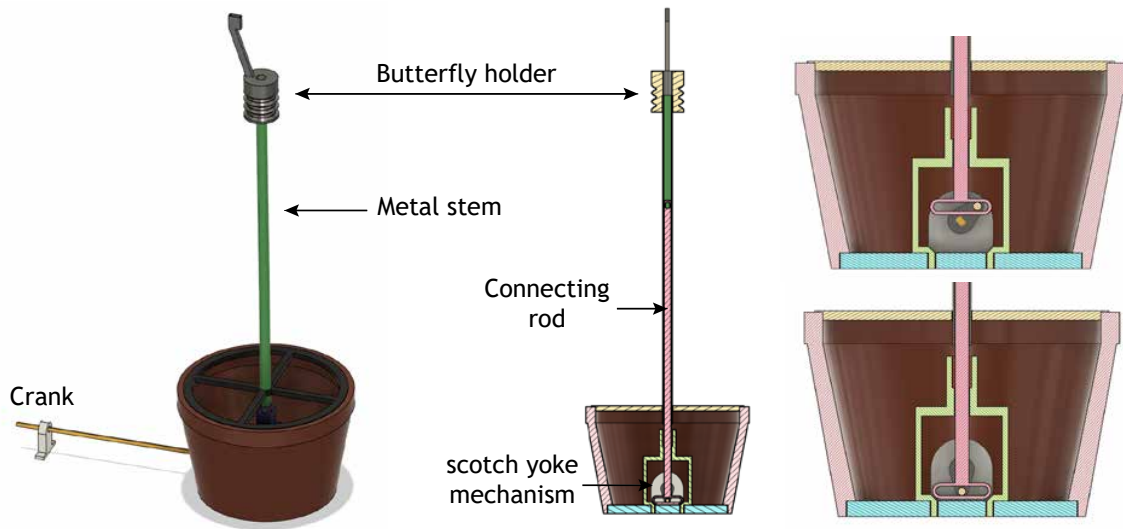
We developed a manually operated scotch yoke mechanism to move the wings of the butterfly up and down as the crank is turned. All of the pieces in the mechanism are 3D-printed except the stem, which is a metal rod.
